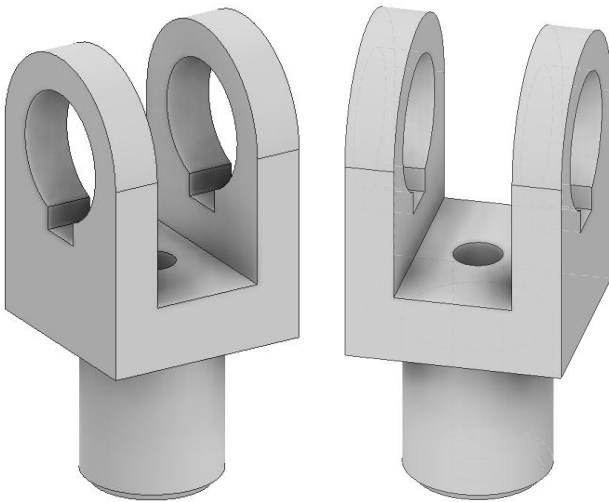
3D model of the clamping fork head part made in the Autodesk Inventor program.
